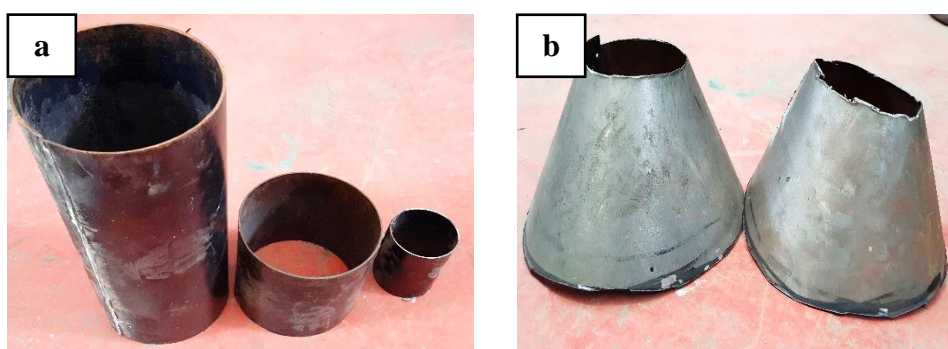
Fabricated parts of gasifier reactor (a) cylindrical parts (b) conical parts
